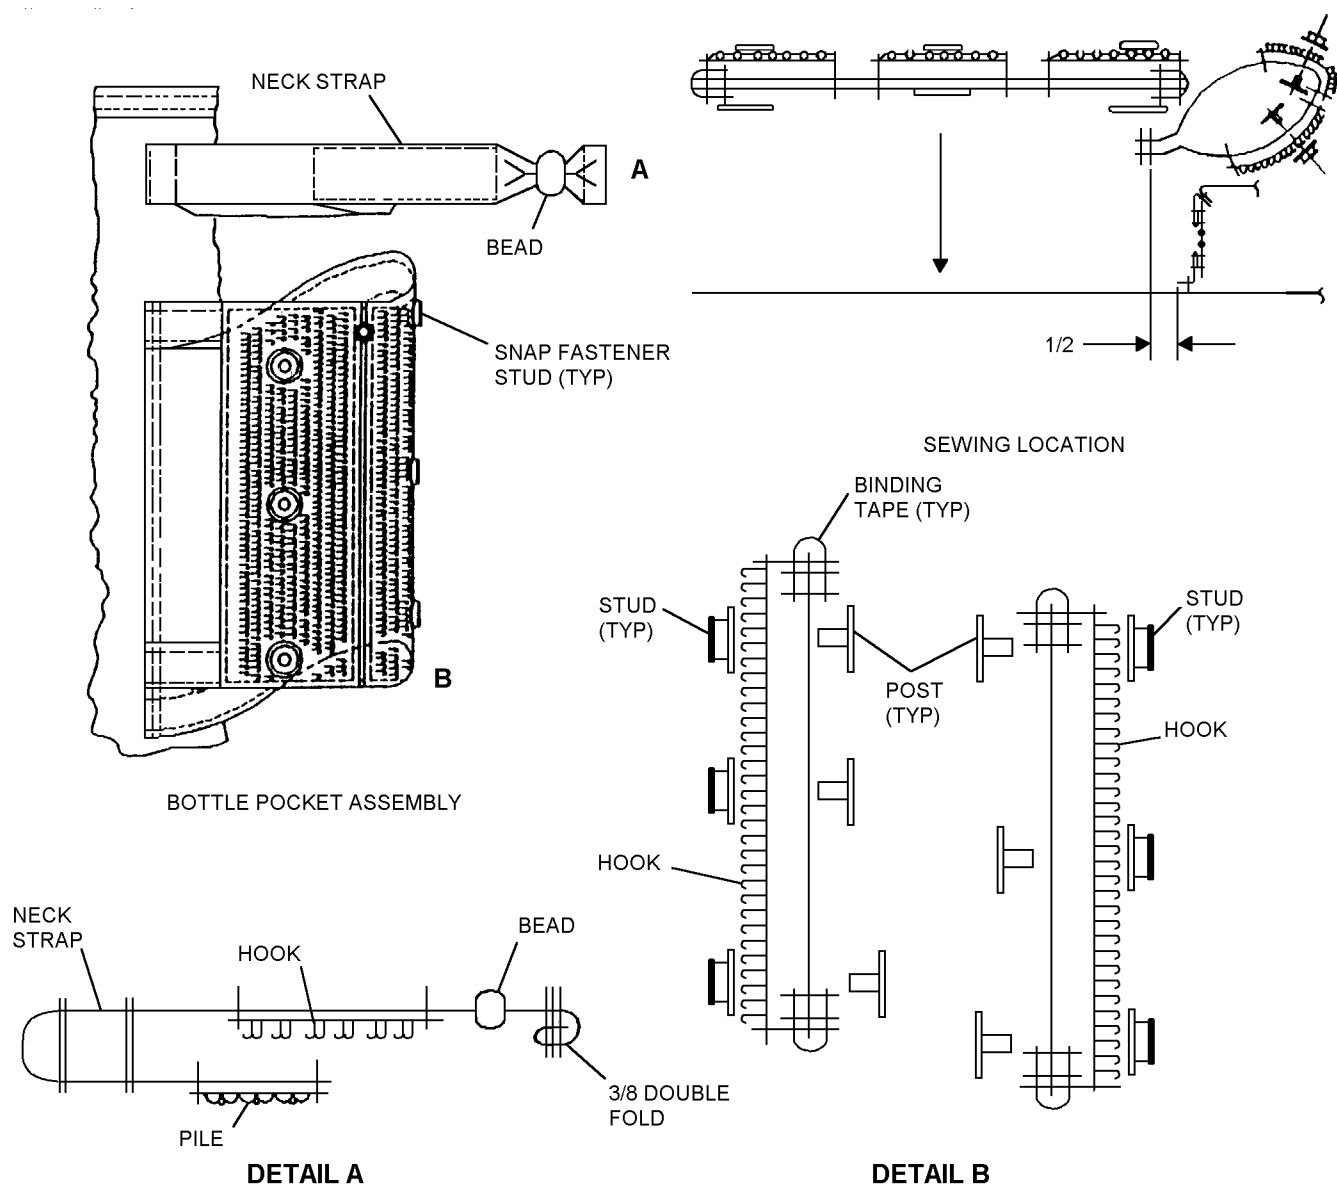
Fabrication of HABD Bottle Pocket Assembly
